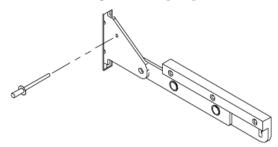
Use Rivet, Screw, or Nail to Hold Hinge Open
